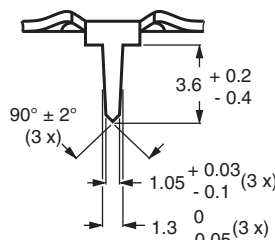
Mounting hole diagram and outline. Form MR: with mounting ring and pins
